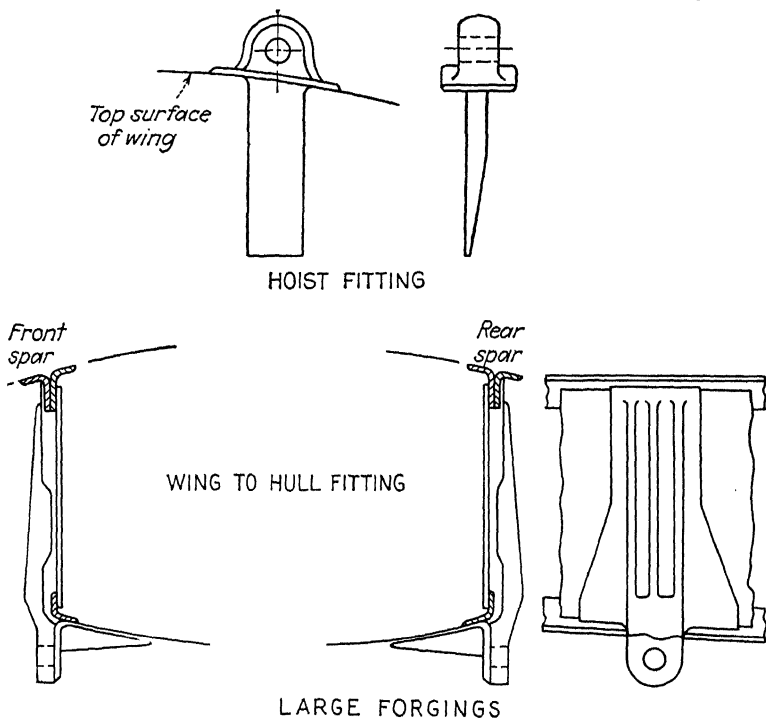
Large aluminum-alloy forgings used in wing construction.
